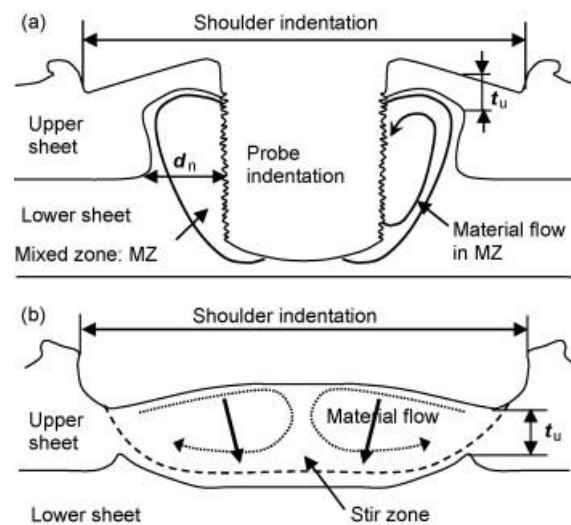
Schematic illustration of weld structures: a) probe tool and b) probe-less scrolled tool [23].
